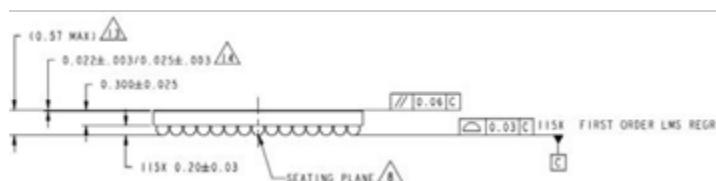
QCA9377 package mechanical dimensions height and seating plane
